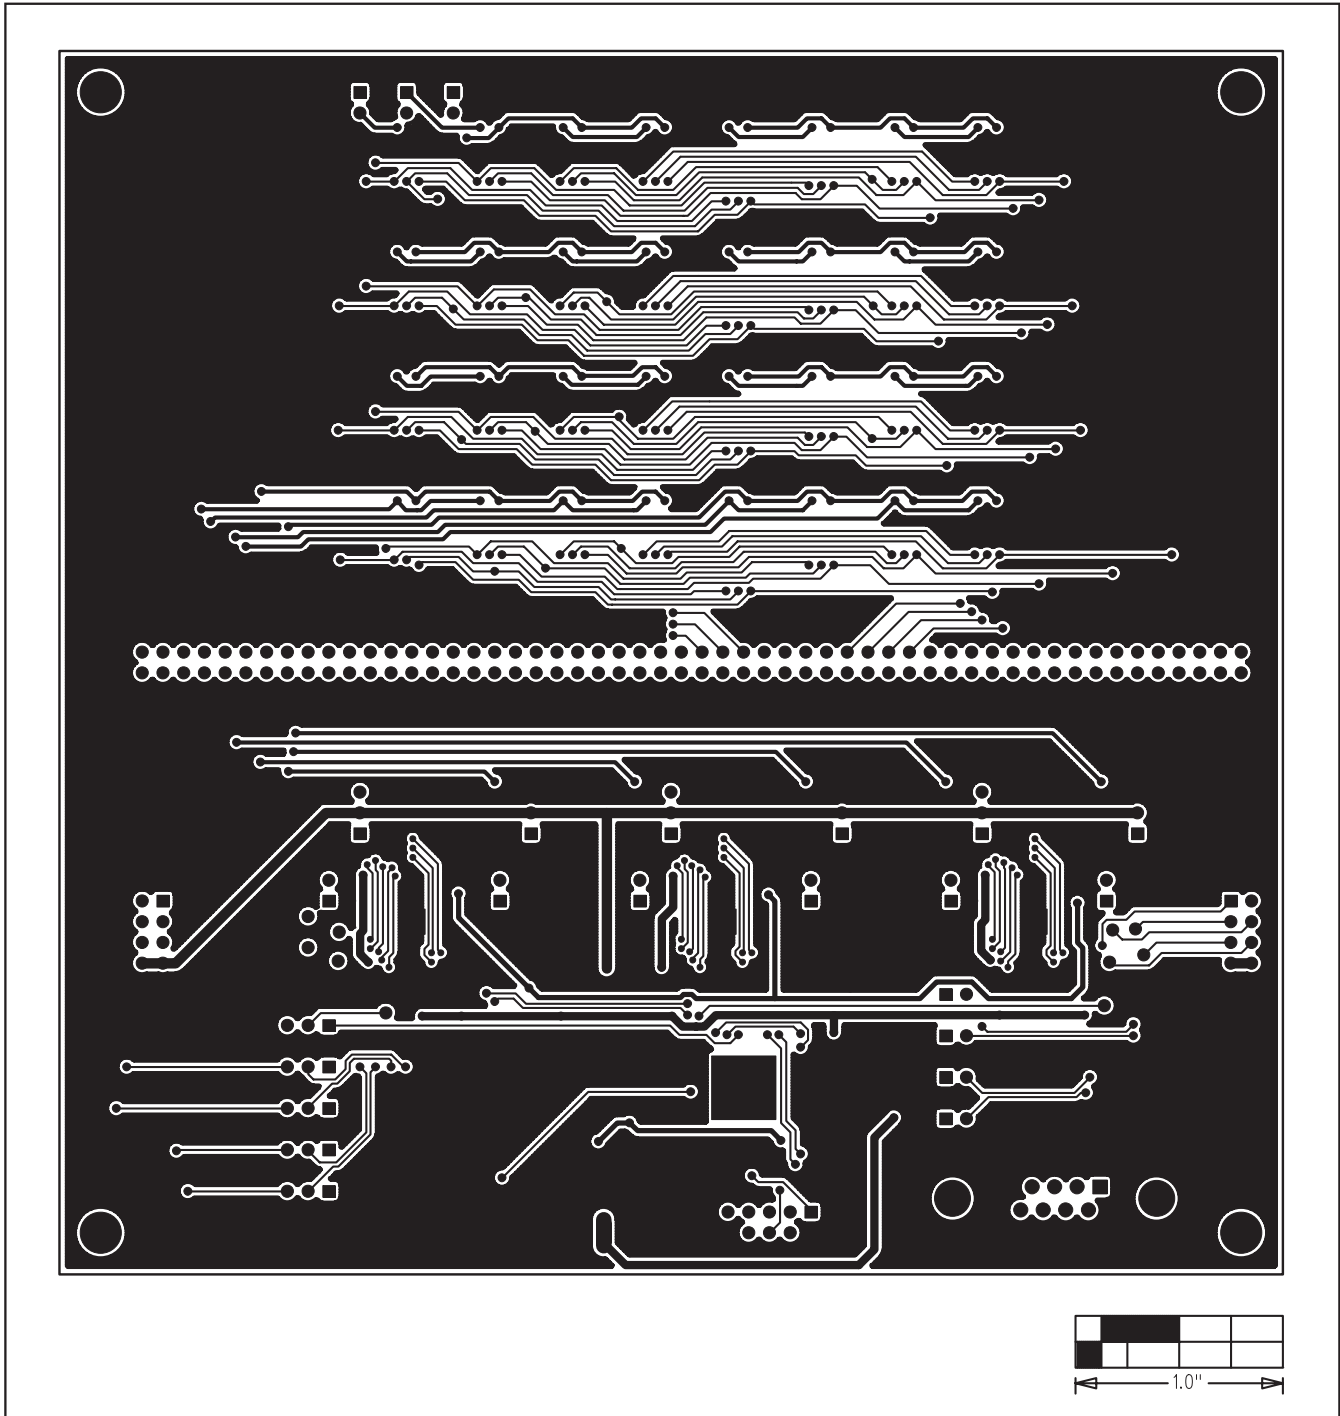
MAX6972 EV Kit PC Board Layout—Solder Side
